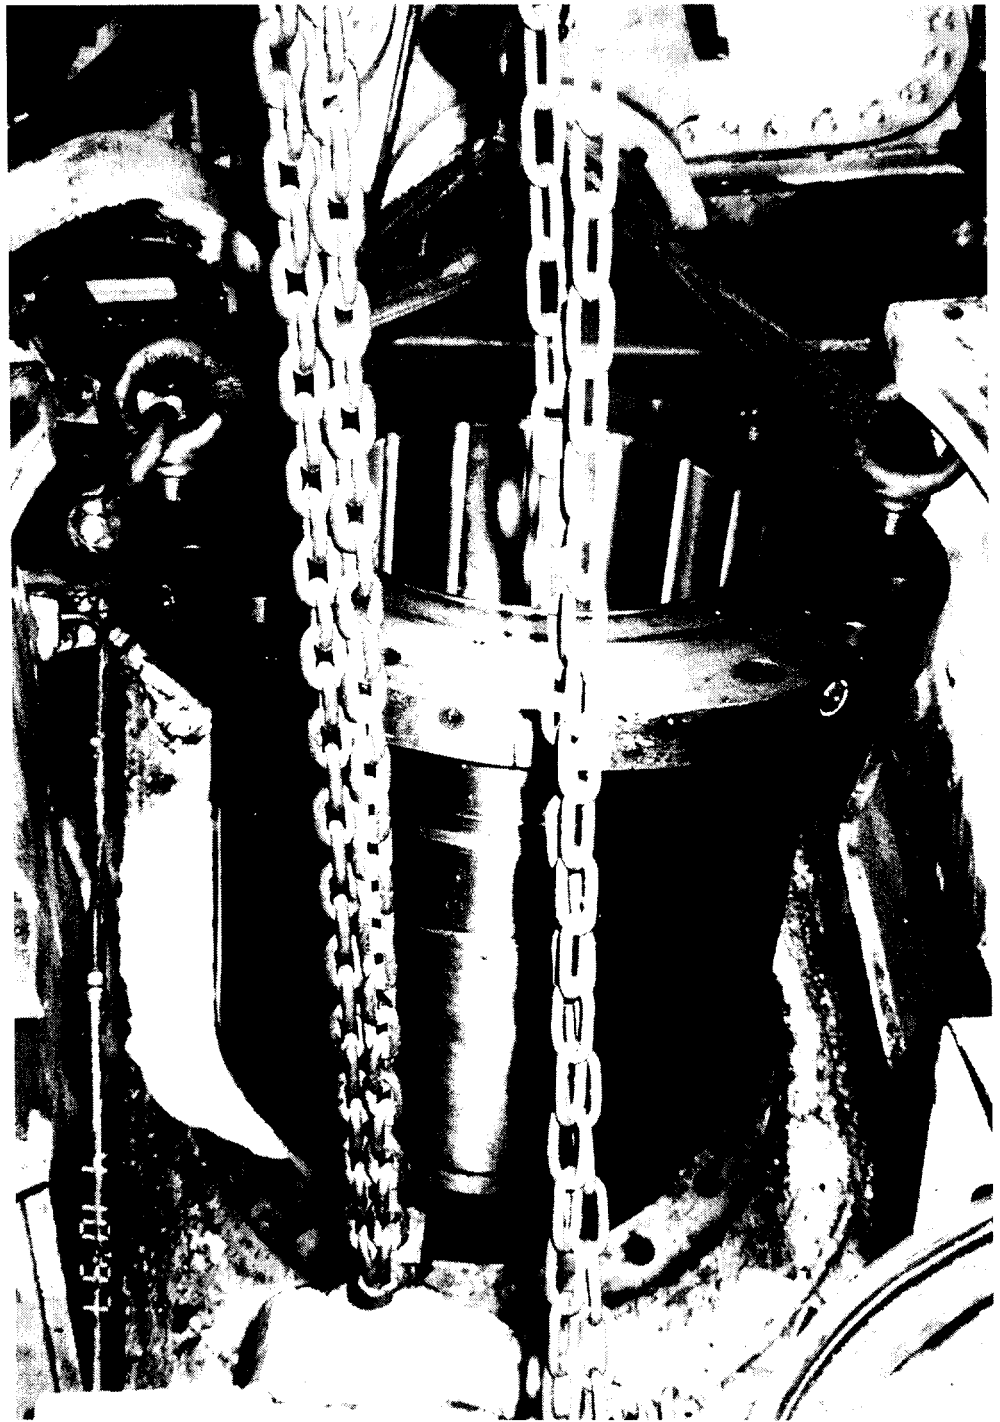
THE NEW OUTBOARD BEARING IS POSITIONED FOR INSTALLATION
